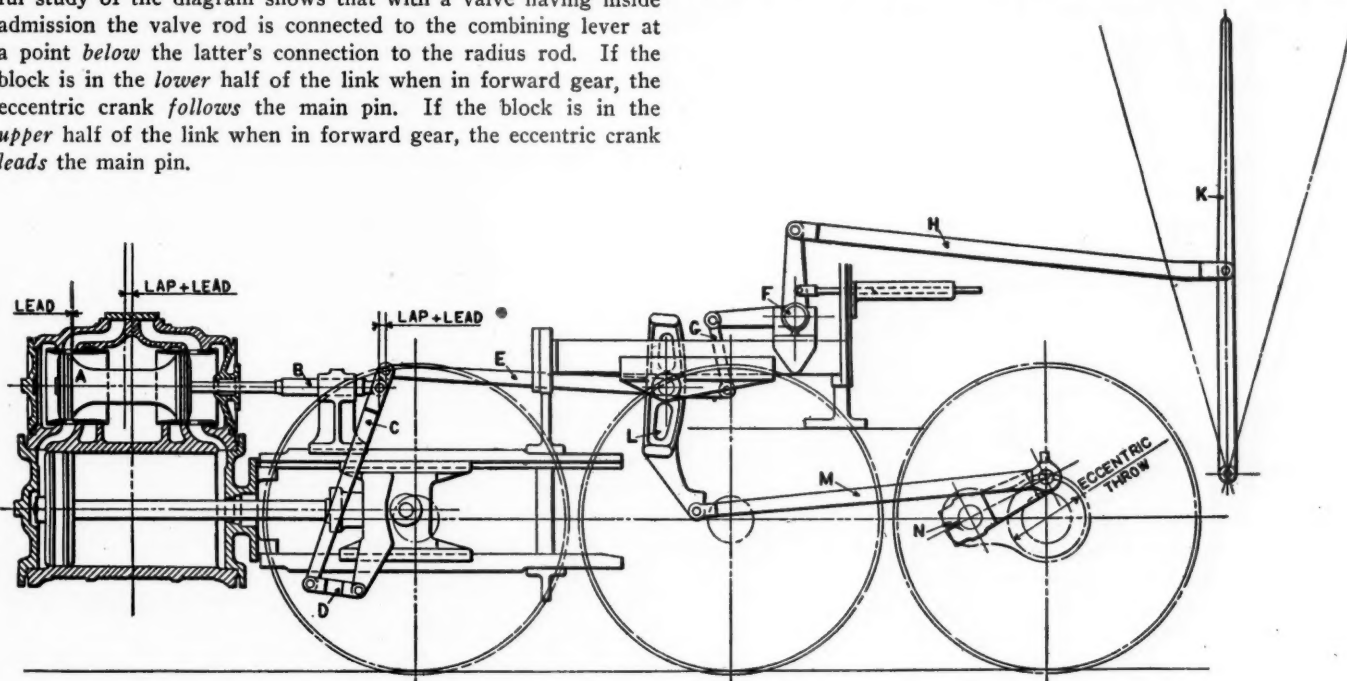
Walschaert Valve Gear as Used with Inside Admission Piston Valves.
